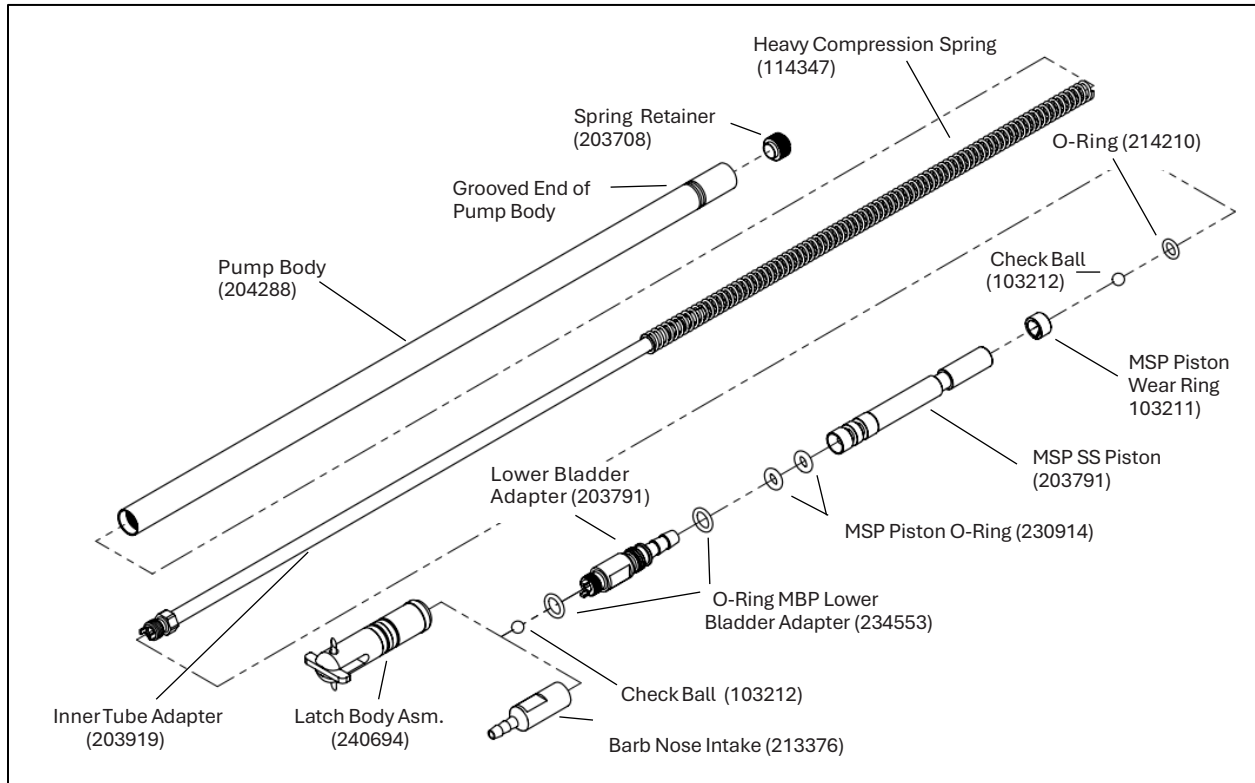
Isometric exploded view of the Mechanical Syringe Pump
